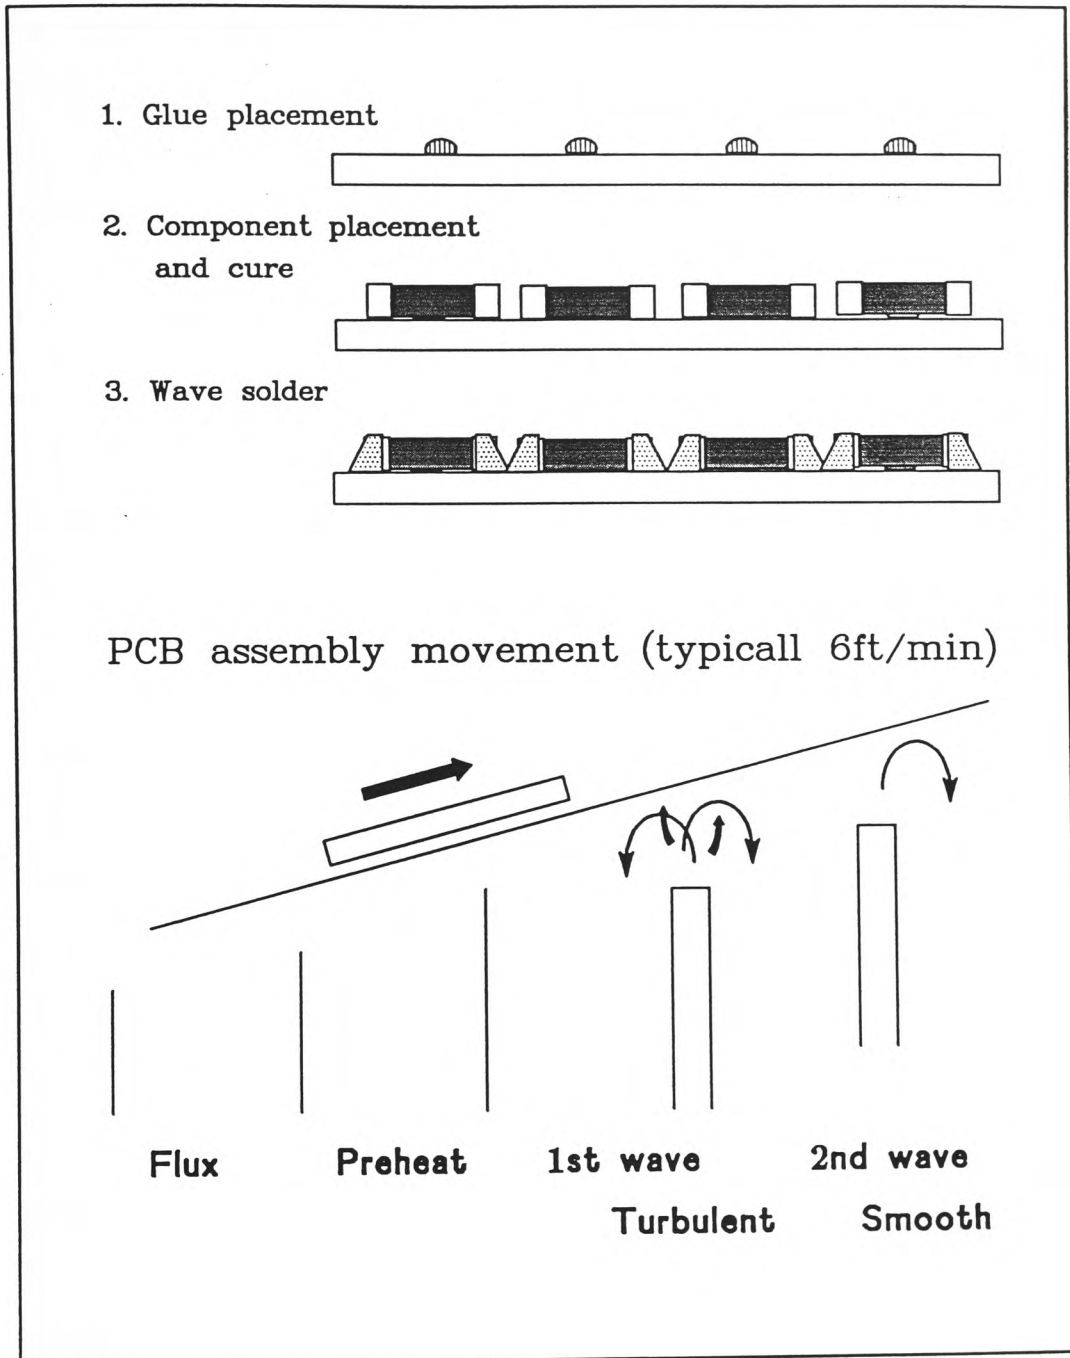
Wave soldering of surface mount assembly with a turbulent wave
